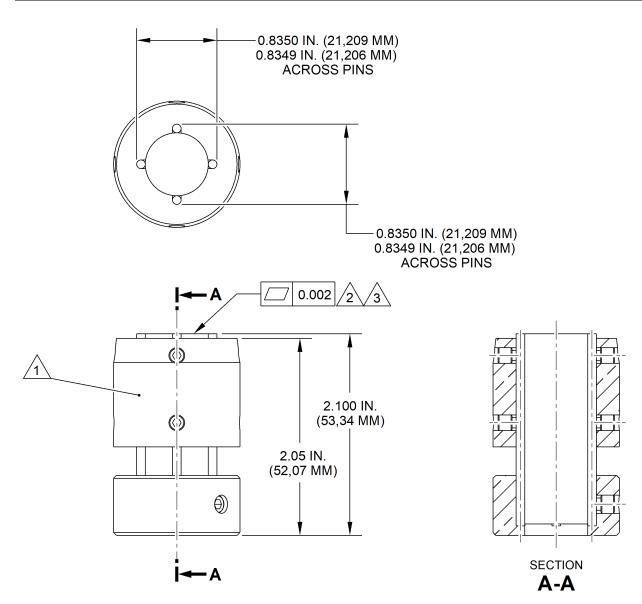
Dampener Plate Gauge (P/N 19-601076) (Sheet 1 of 4)
